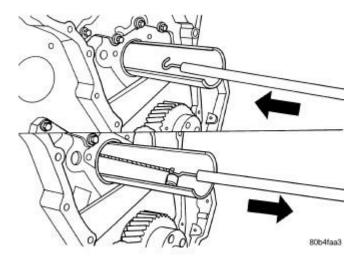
Retrieve Tappet Installation Tool Through Cam Bore Courtesy of CHRYSLER GROUP, LLC
